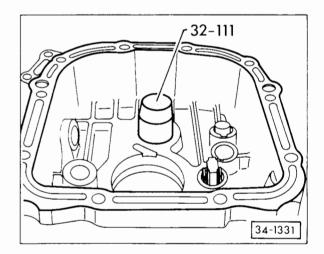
Driving outer race/needle bearing out of the bearing carrier
